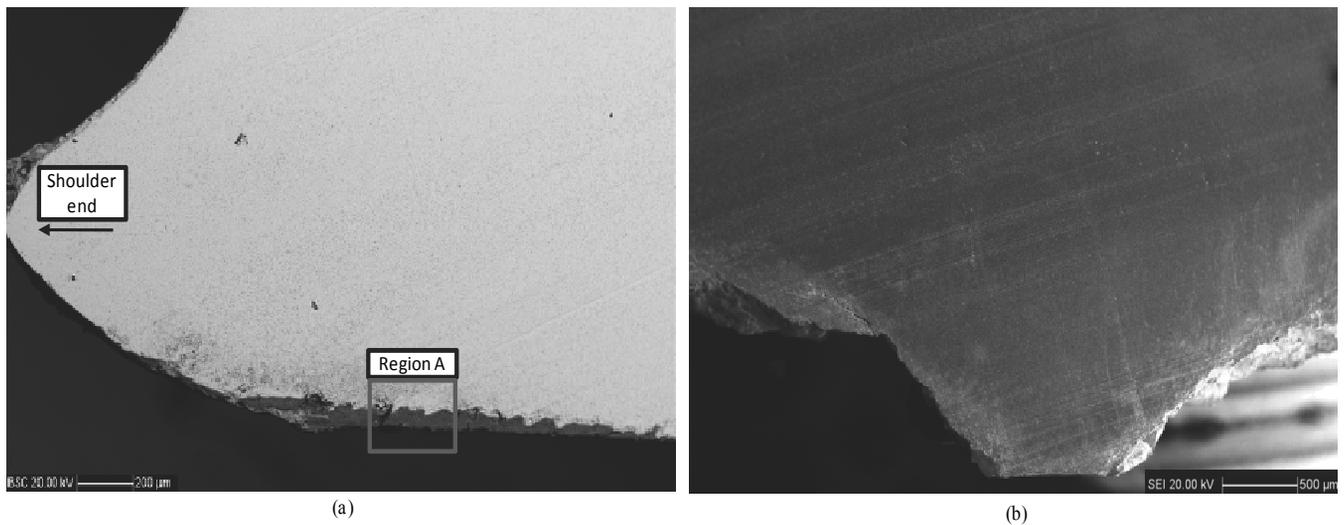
(a) Transversal micrograph of tool shoulder; (b) transversal micrograph of tool pin showing the fractured region
